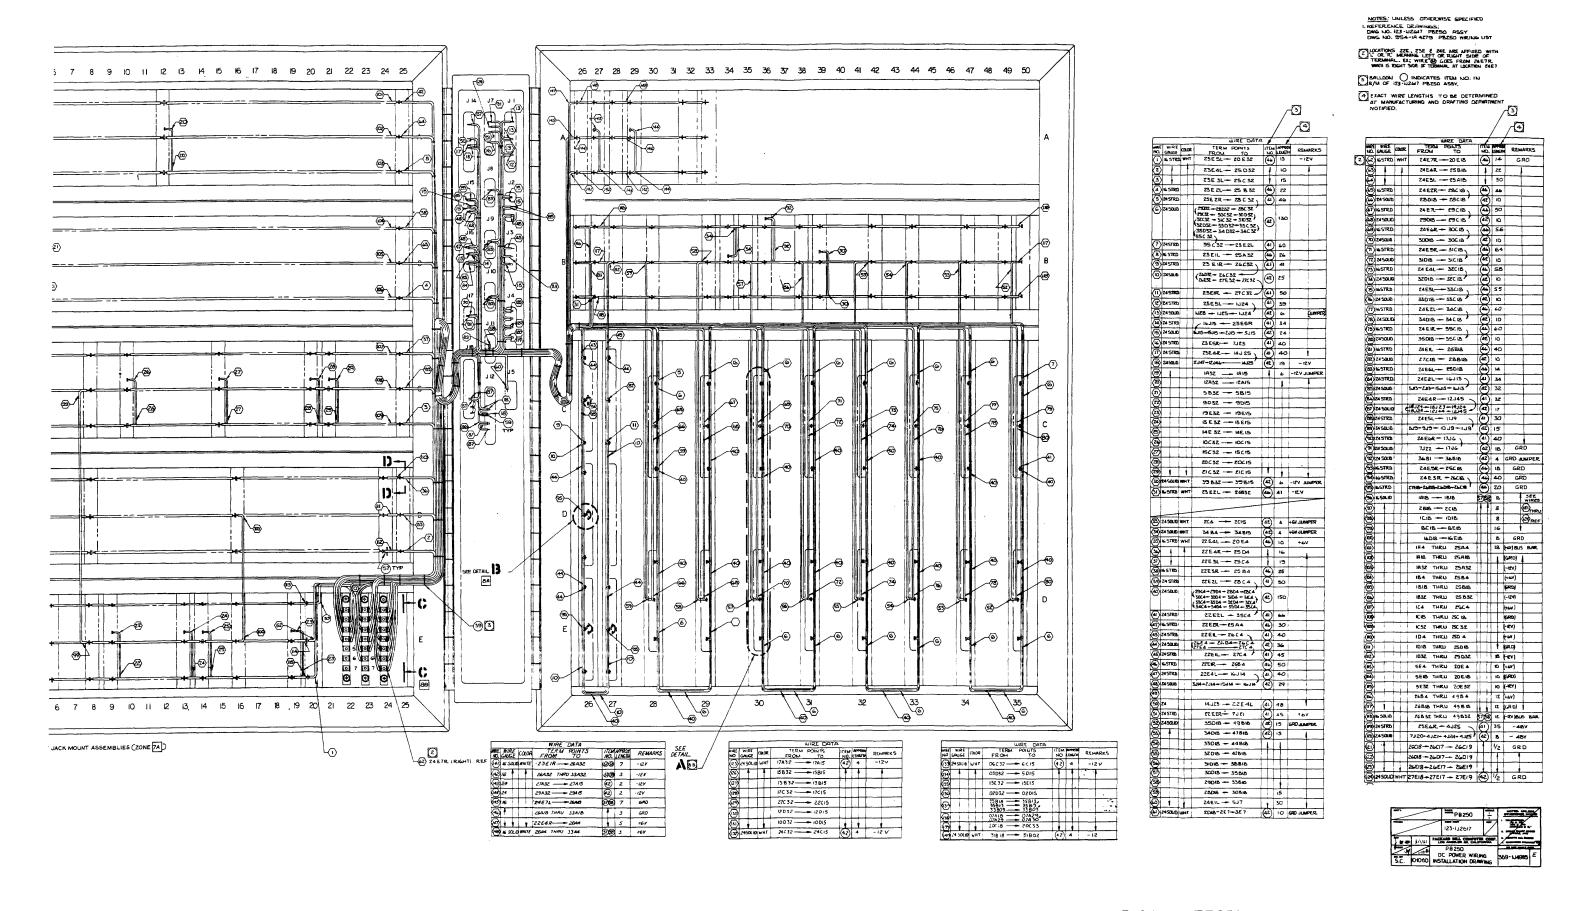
PB250 DC Power Wiring Installation Drawing
